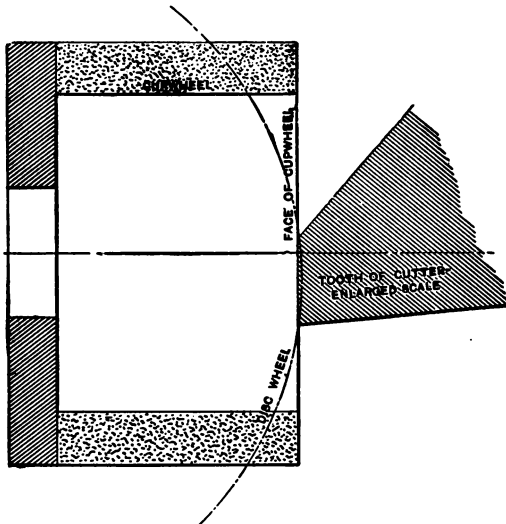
Comparison between Action of Disk Wheel and Cup Wheel when Grinding Milling Cutter Teeth
